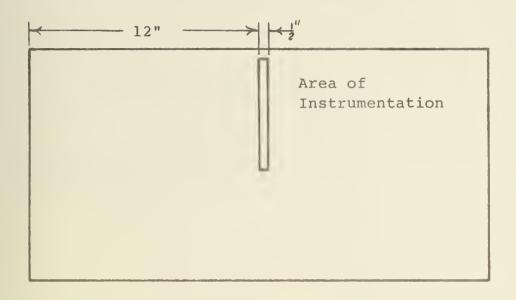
Location of Instrumentation on HY-130 Specimen I and 1020 Steel
